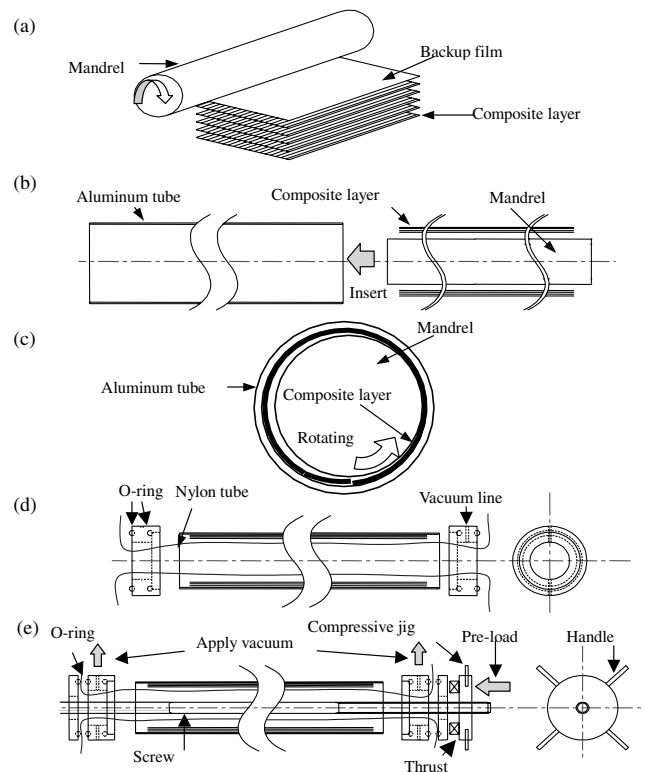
Manufacturing procedure for the aluminum/composite drive shaft: (a) stacking four carbon fiber epoxy composite layers and one glass fiber epoxy composite layer on a mandrel; (b) inserting the mandrel with the wrapped composite layer into the aluminum tube; (c) stacking the composite layer using mandrel on the inner surface of the aluminum tube; (d) inserting a vacuum bag and fixing caps which have a vacuum line and O-rings; (e) applying preload and curing.
